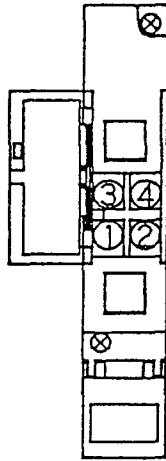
Nomenclature and Terminal Arrangement of DH1, DA1, DA2
